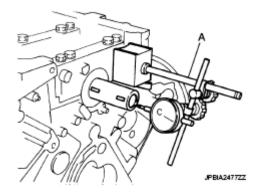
Measuring Clearance Between Thrust Bearings And Crankshaft Arm
